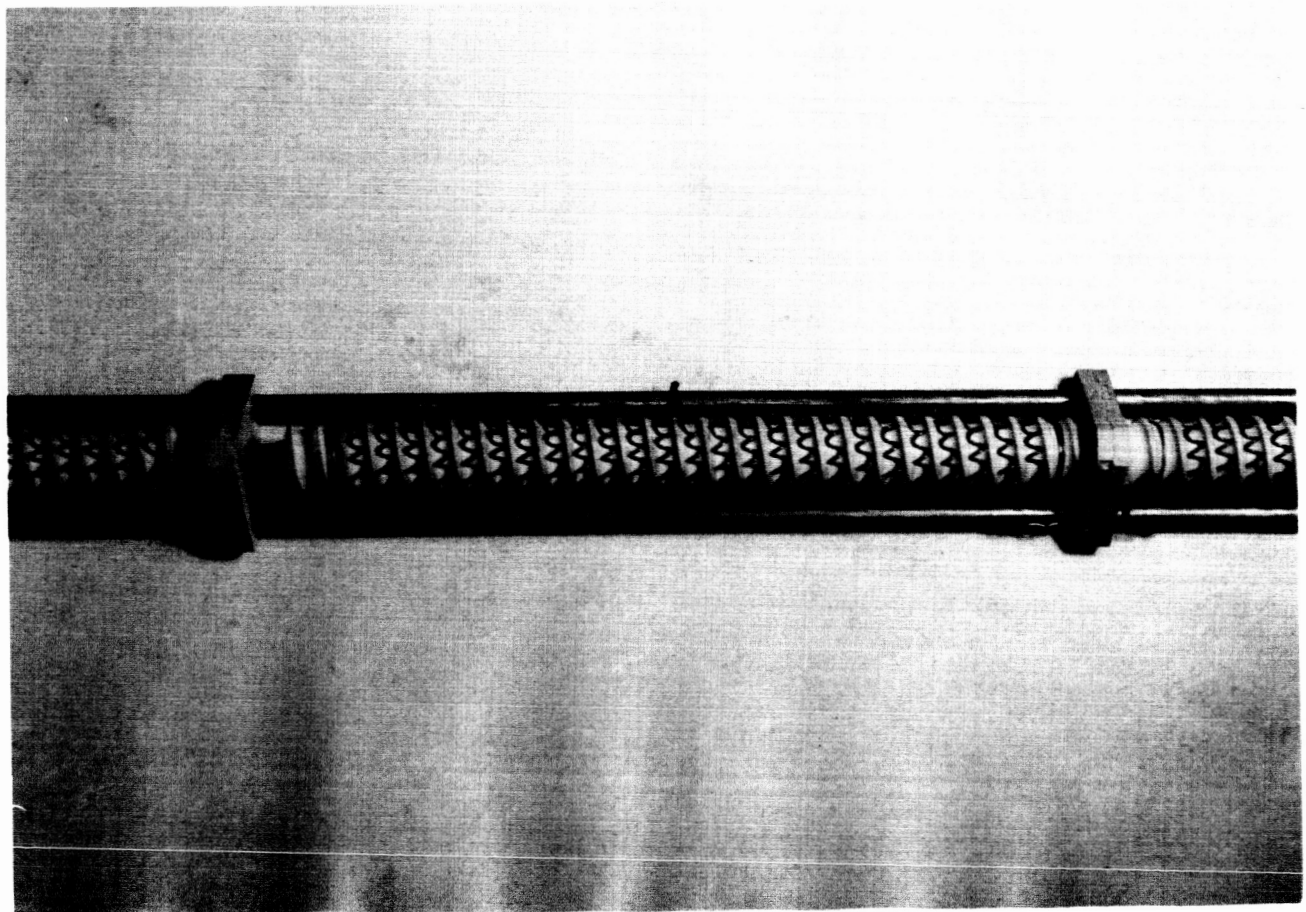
ELEMENT ARRANGEMENT, HEATER ASSEMBLY
